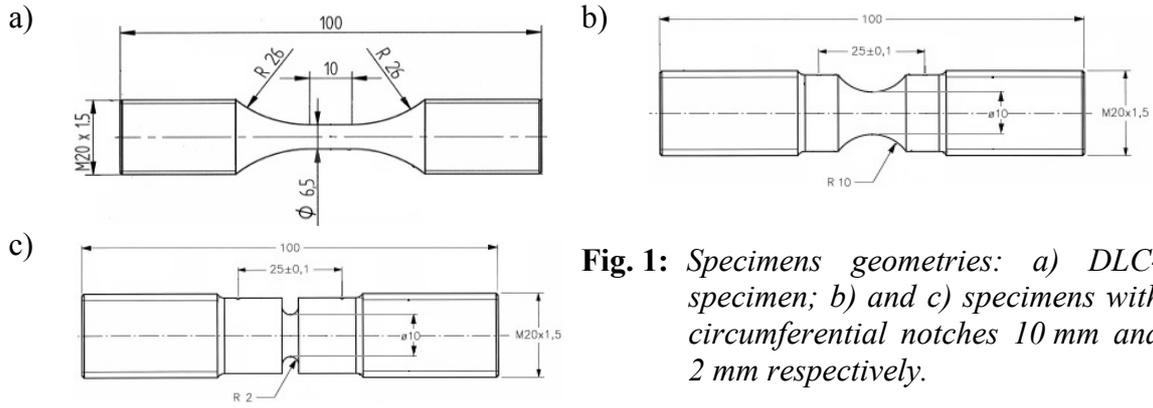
Specimens geometries: a) DLC-specimen; b) and c) specimens with circumferential notches 10 mm and 2 mm respectively.
